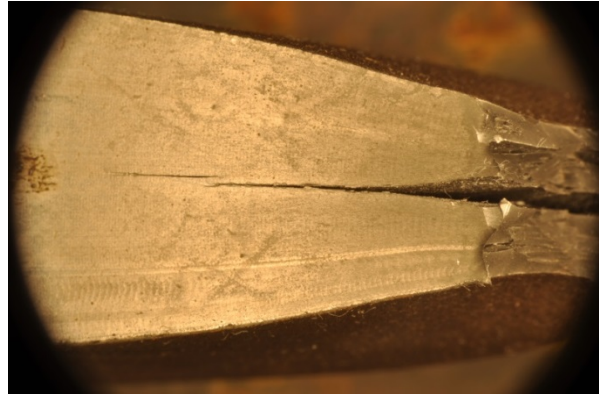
Side view of fracture surface for as-rolled longitudinal tensile test specimen.
